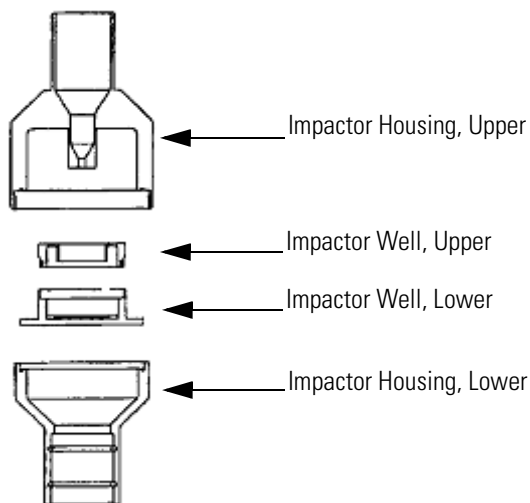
Exploded View of PM_{2.5} WINS Impactor
